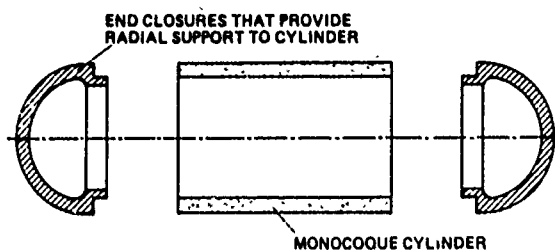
Typical Approach to Raising the Elastic Stability of an External Pressure Housing Assembly Consisting of a *Single* Monocoque Cylinder Utilizes Radial Support Provided to the Cylinder Ends by Compliant End Closures.
